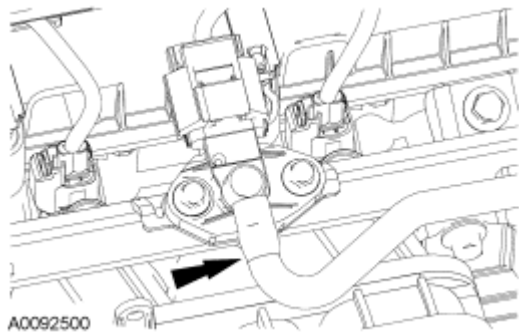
Locating Fuel Rail Pressure And Temperature Sensor Vacuum Hose
